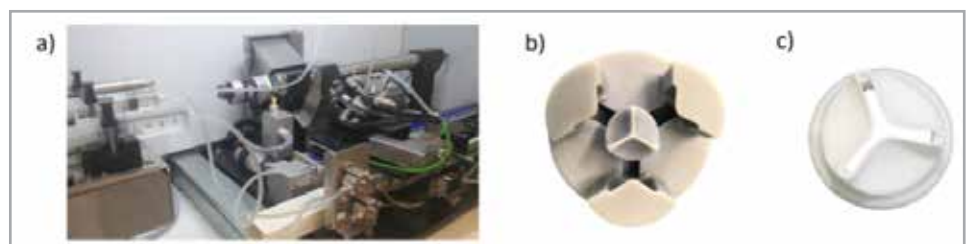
Spray machine (a) for additive manufacturing, custom mold/modular outer mold system (b) and final valve (c)
